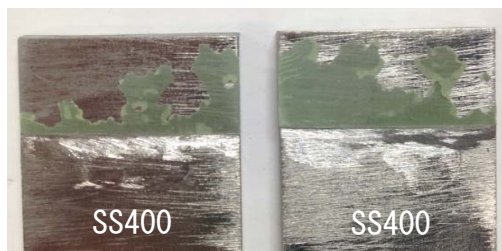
Fracture surface in the case of SS400/SS400 joint
